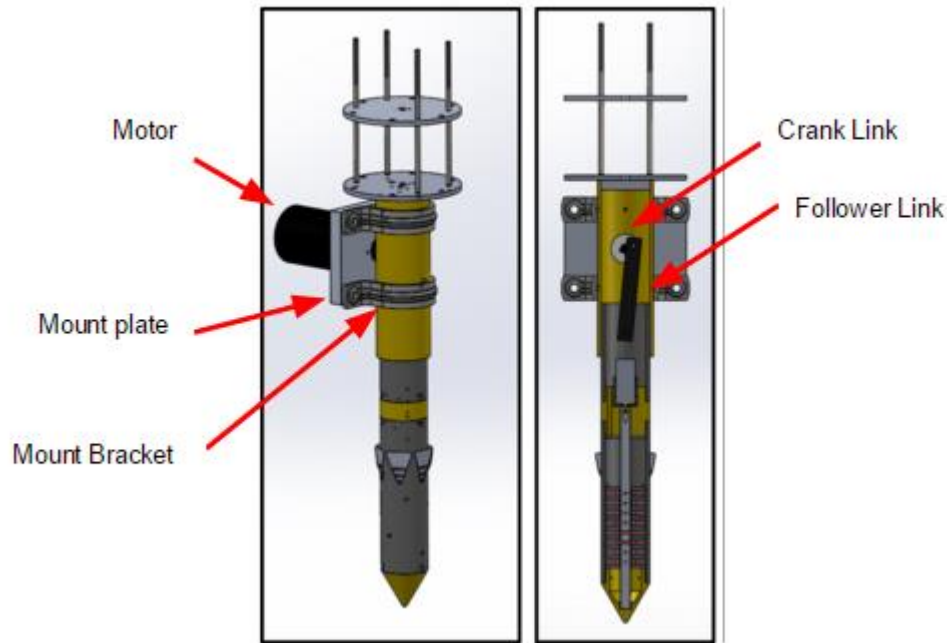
Percussive digging subsystem CAD image. The left image shows the drive motor and its mounting bracket. The right image is a section view of the assembly showing the slider crank mechanism.
